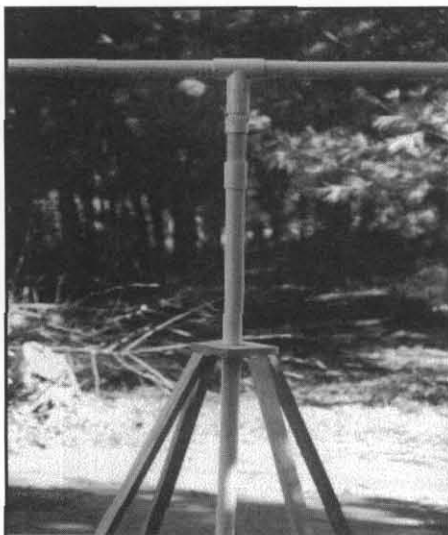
A beam mounted on a PVC mast mounted in my shop antenna assembly jig.
